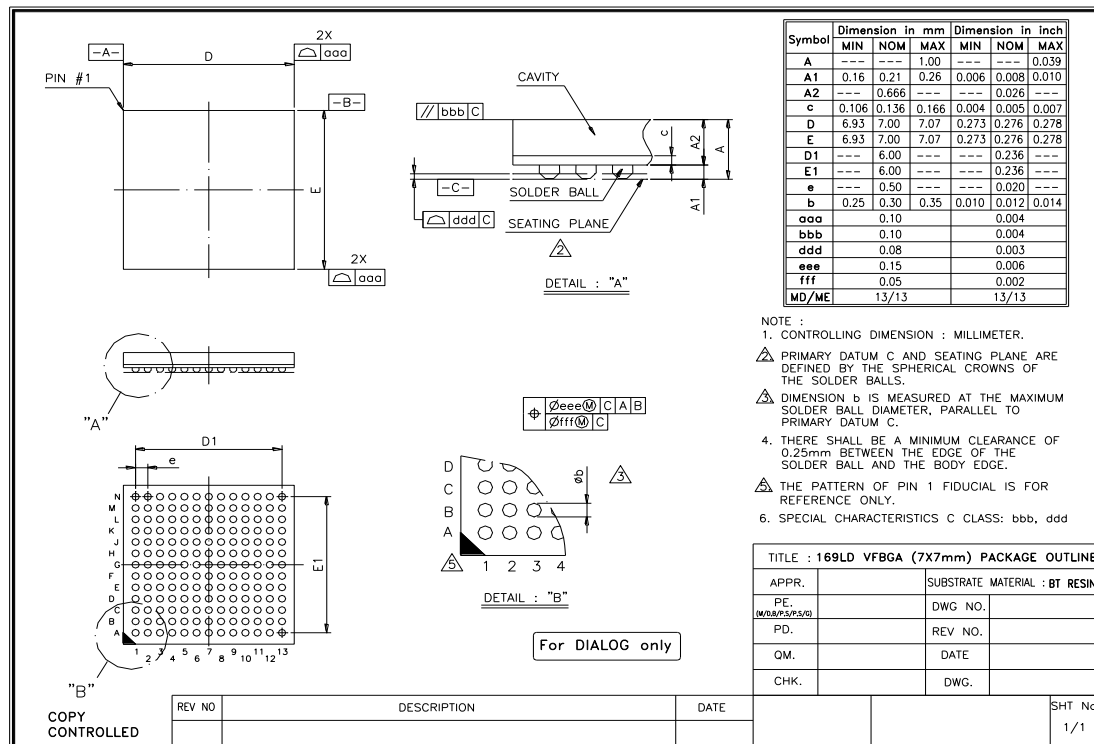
169LD-VFBGA (7 x 7 mm) Package Outline Drawing
